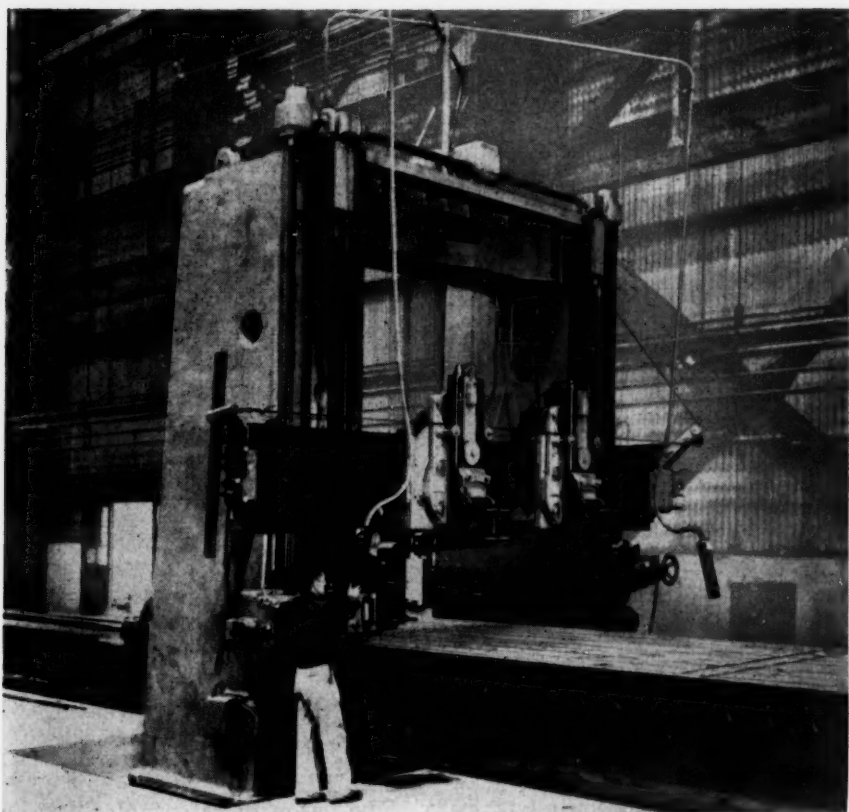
The planer shown here has a table travel area of 44 feet, overall bed length of 92 feet, and width between the double housings of 122½ inches.
